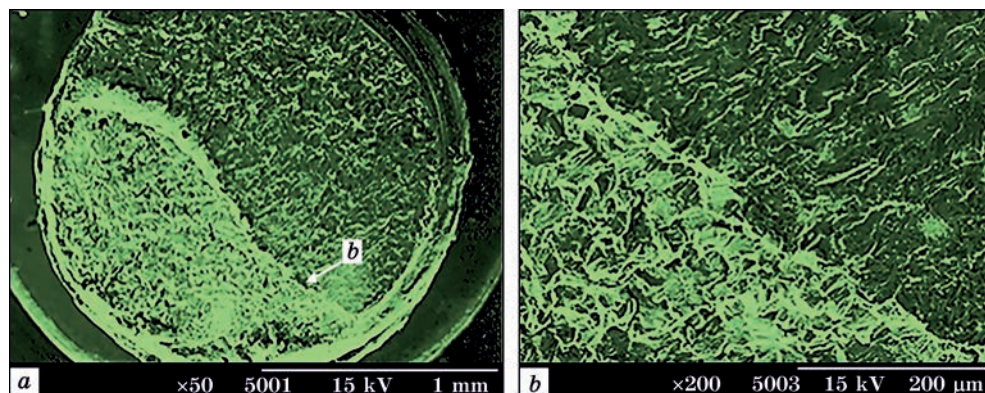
Typical scanning electron photomicrographs from the fracture surface of the failed abutment screw [53]
